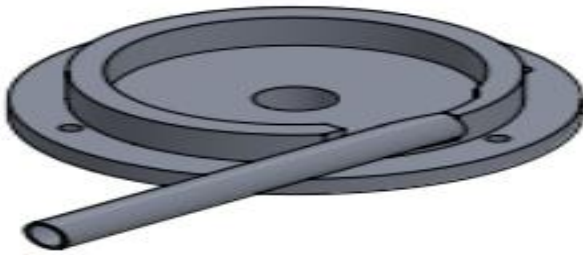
3D model of the impeller casing which has the discharge outlet
